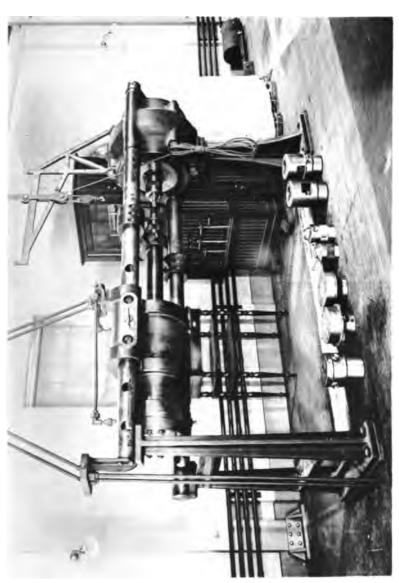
shows the 100,000 pounds Emery testing machine, built by Wm. Sellers & Co. This also is adapted for applying loads of tension and compression and transverse stresses to beams of short span. It is adjusted in position for the test of specimens of different lengths along the side rods, where it may be retained in a number of places by means of pins. The principal dimensions are:
